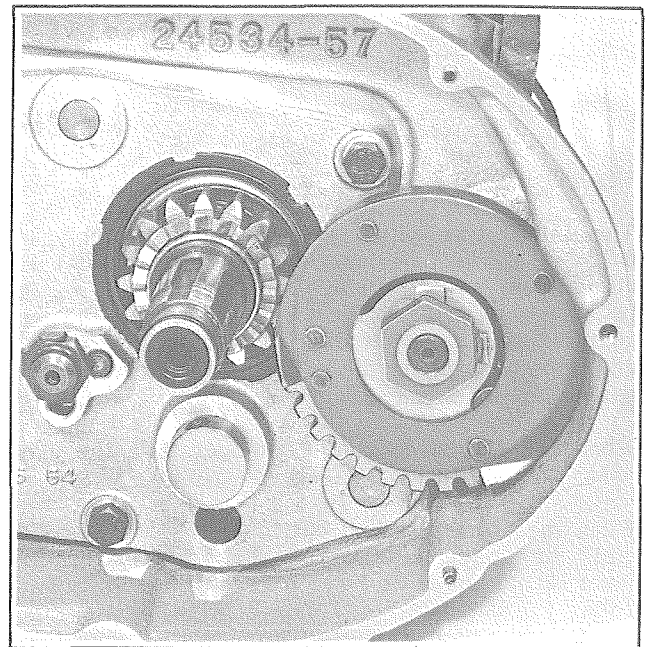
C-4. Positioning Starter Crank Gear on Starter Shaft
